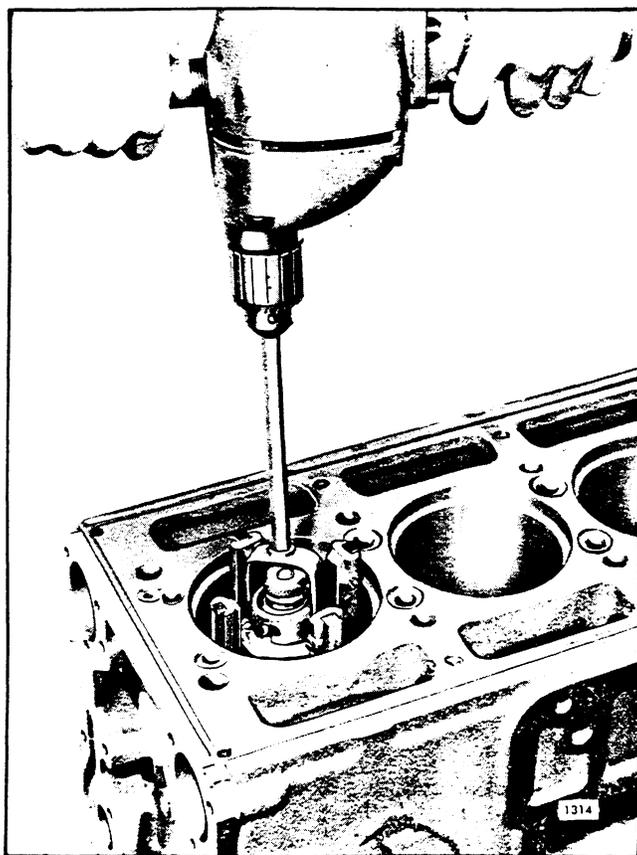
Honing Bore of Cylinder Block with Tool J 5902-01
